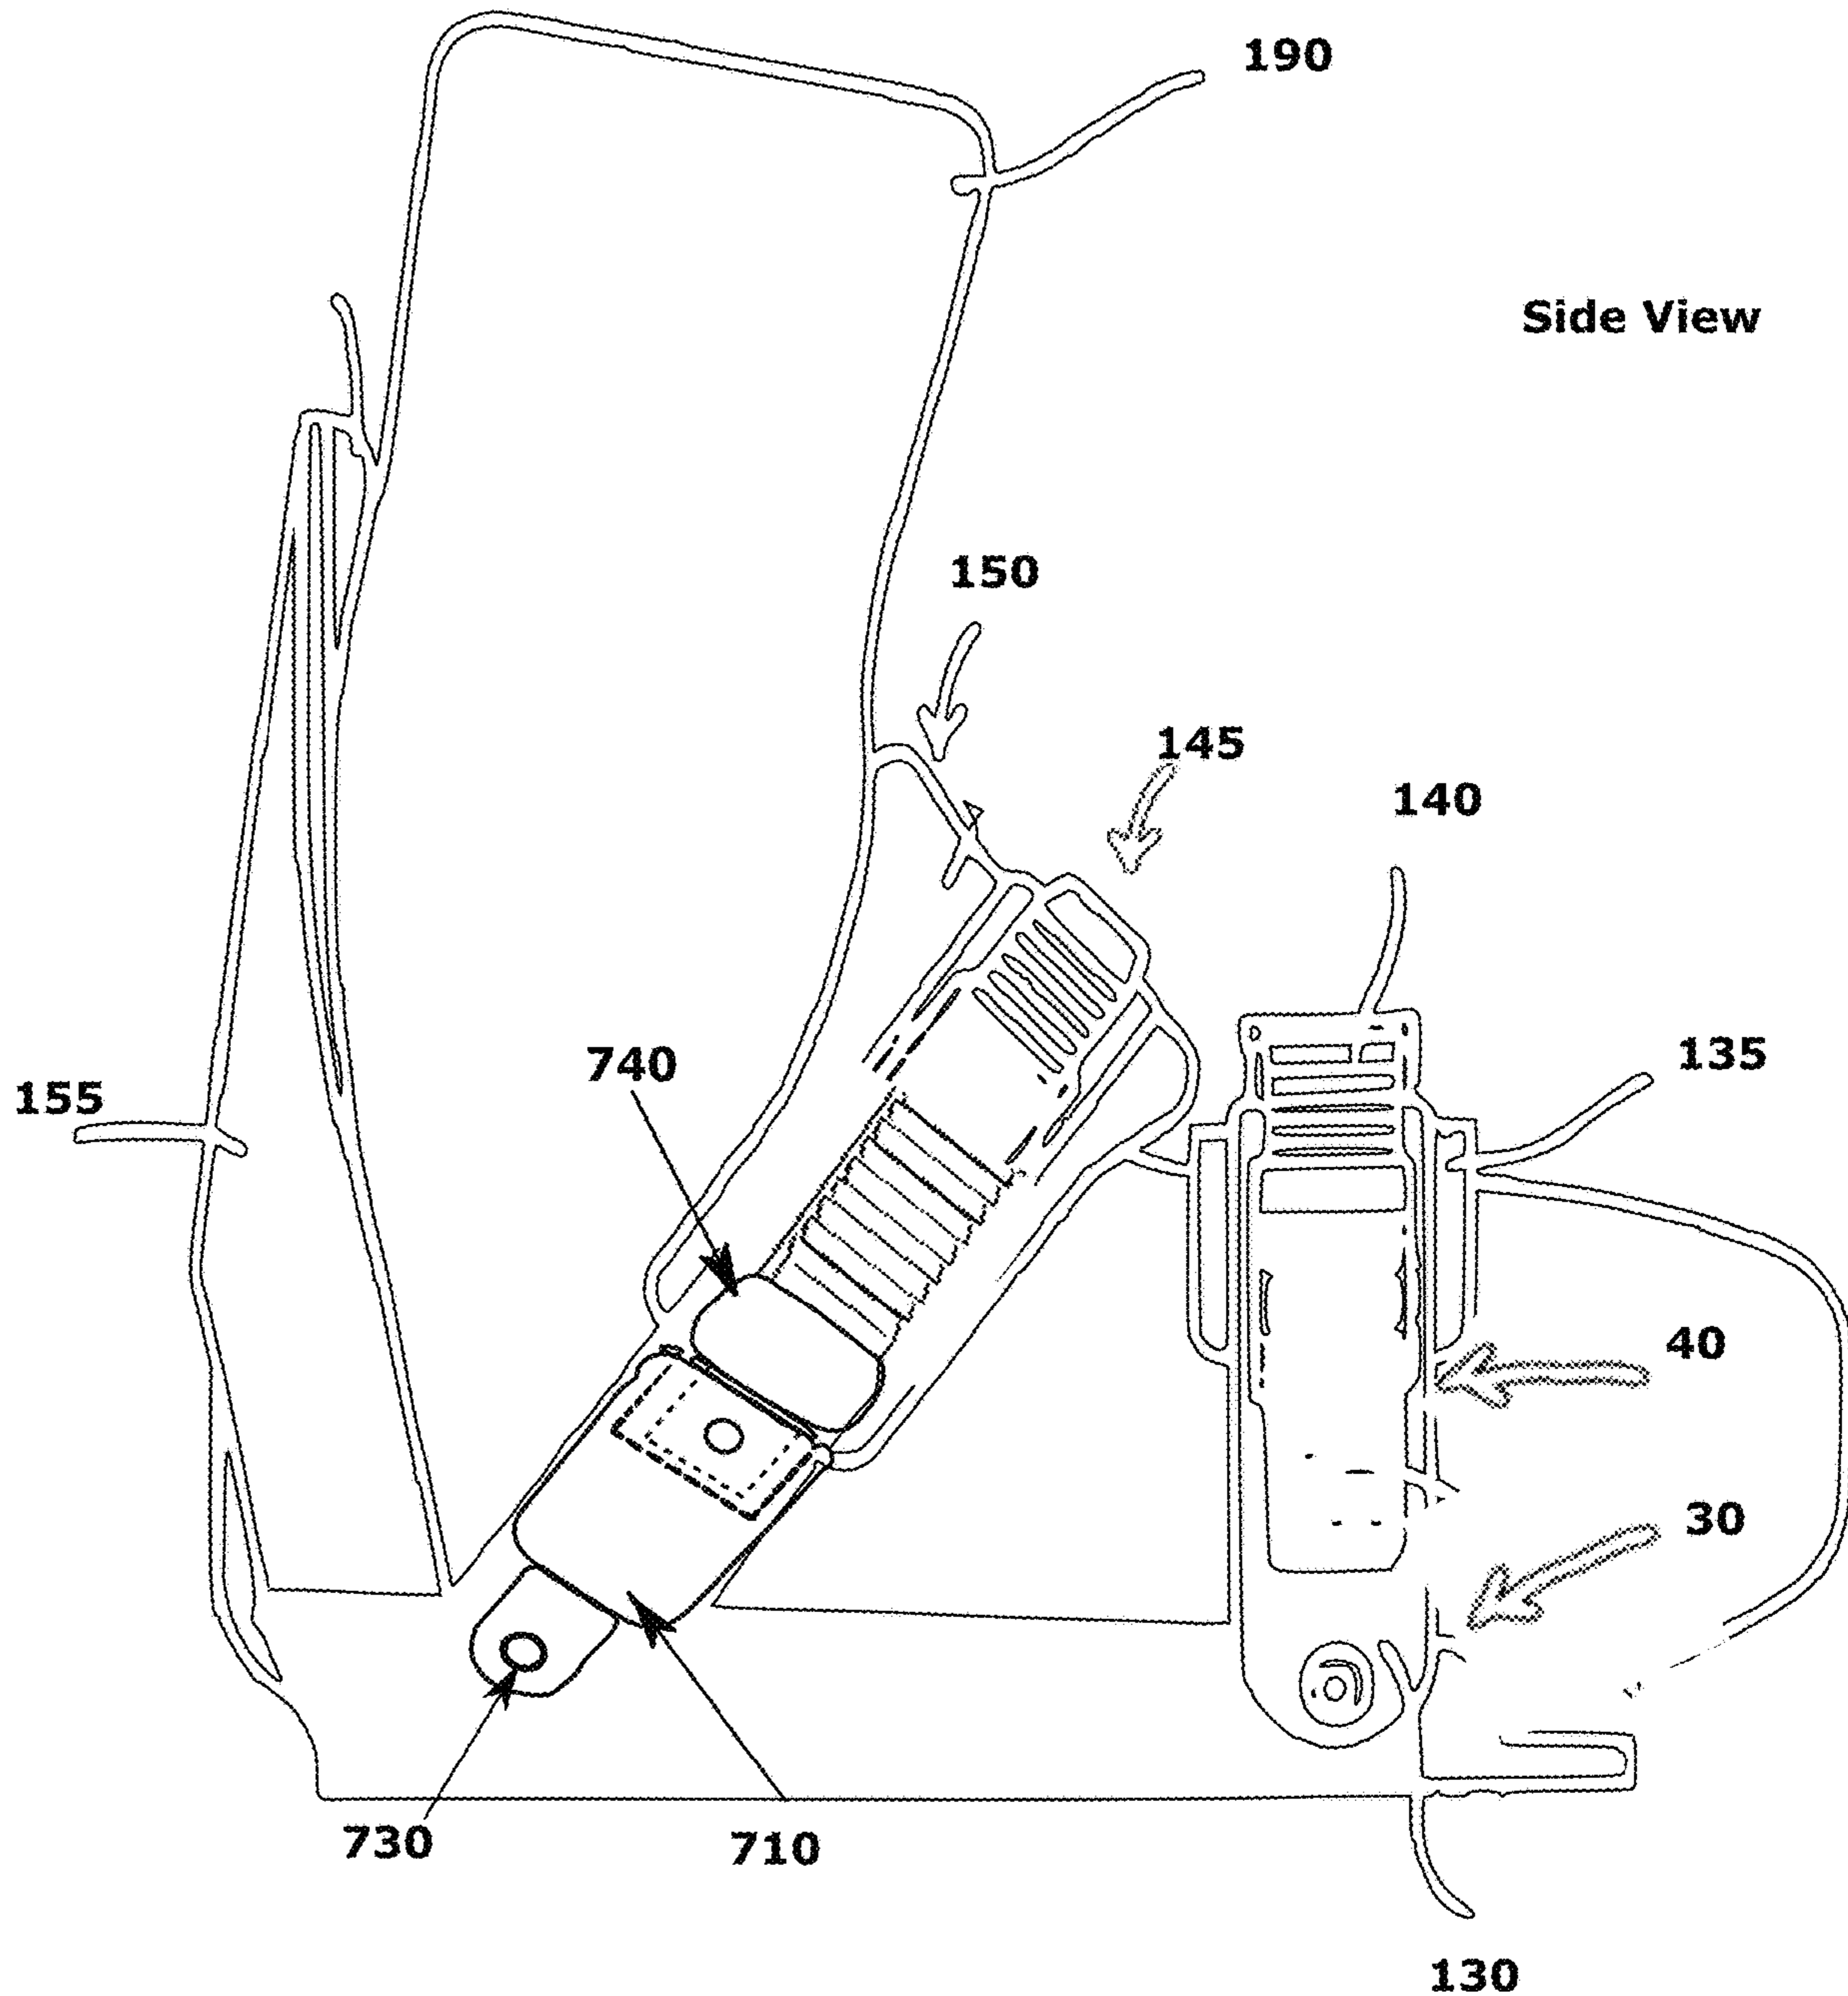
Drawing of an embodiment of one-handed strap with a rotating member attached to binding.
